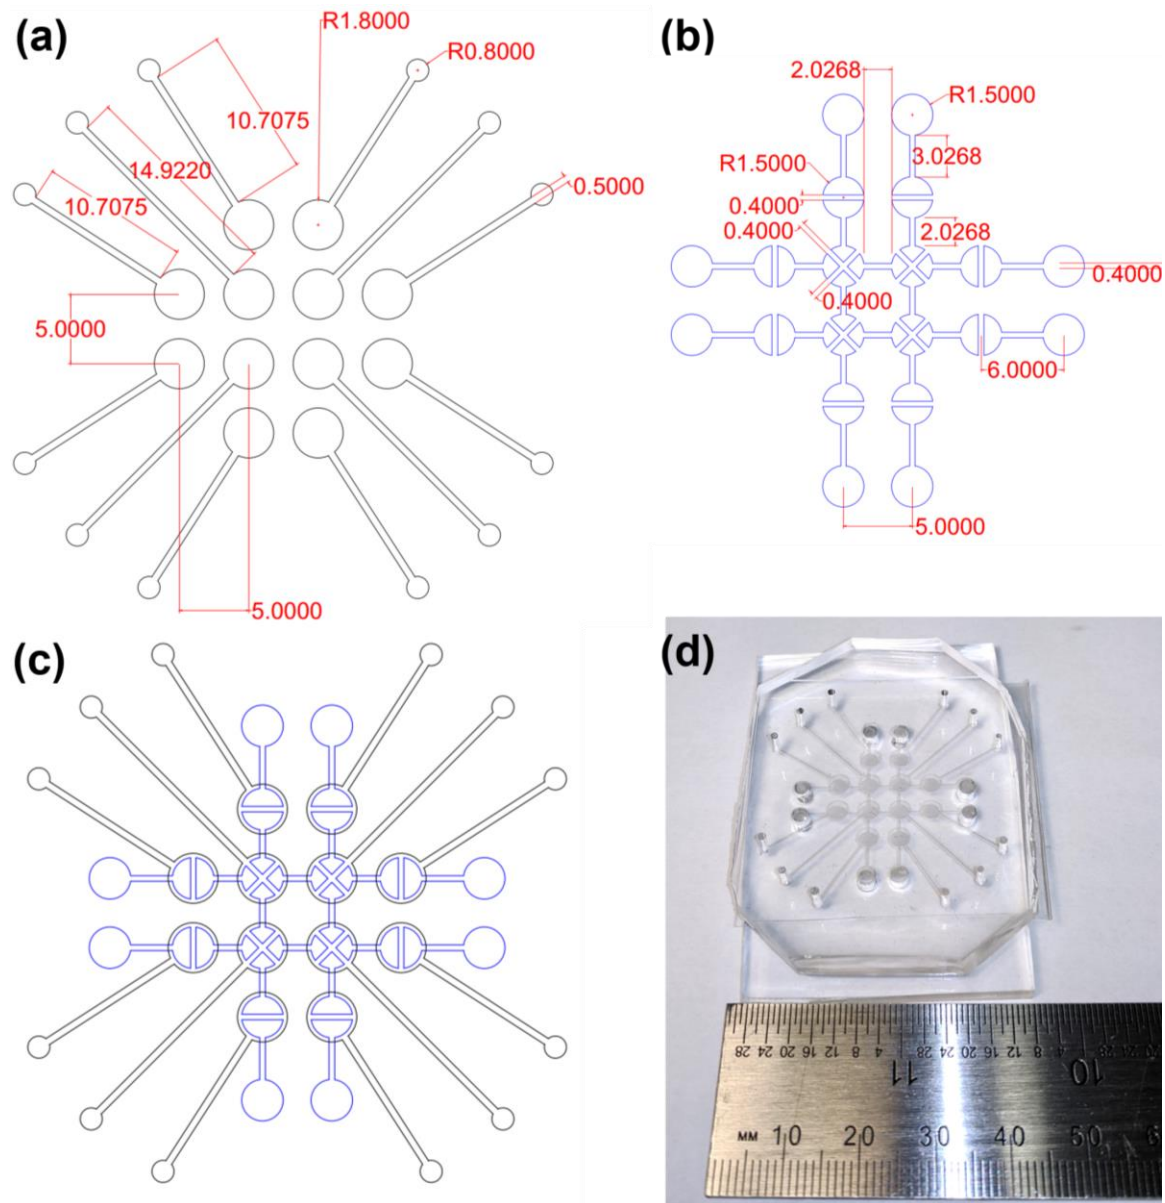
Design of a 2x2 pneumatic lifting gate microfluidic processor. (a) Pneumatic layer design with dimensions. (b) Fluidic layer design with dimensions. (c) Layers aligned. (d) Photograph of the final device. All dimensions are in mm, if not denoted otherwise.
